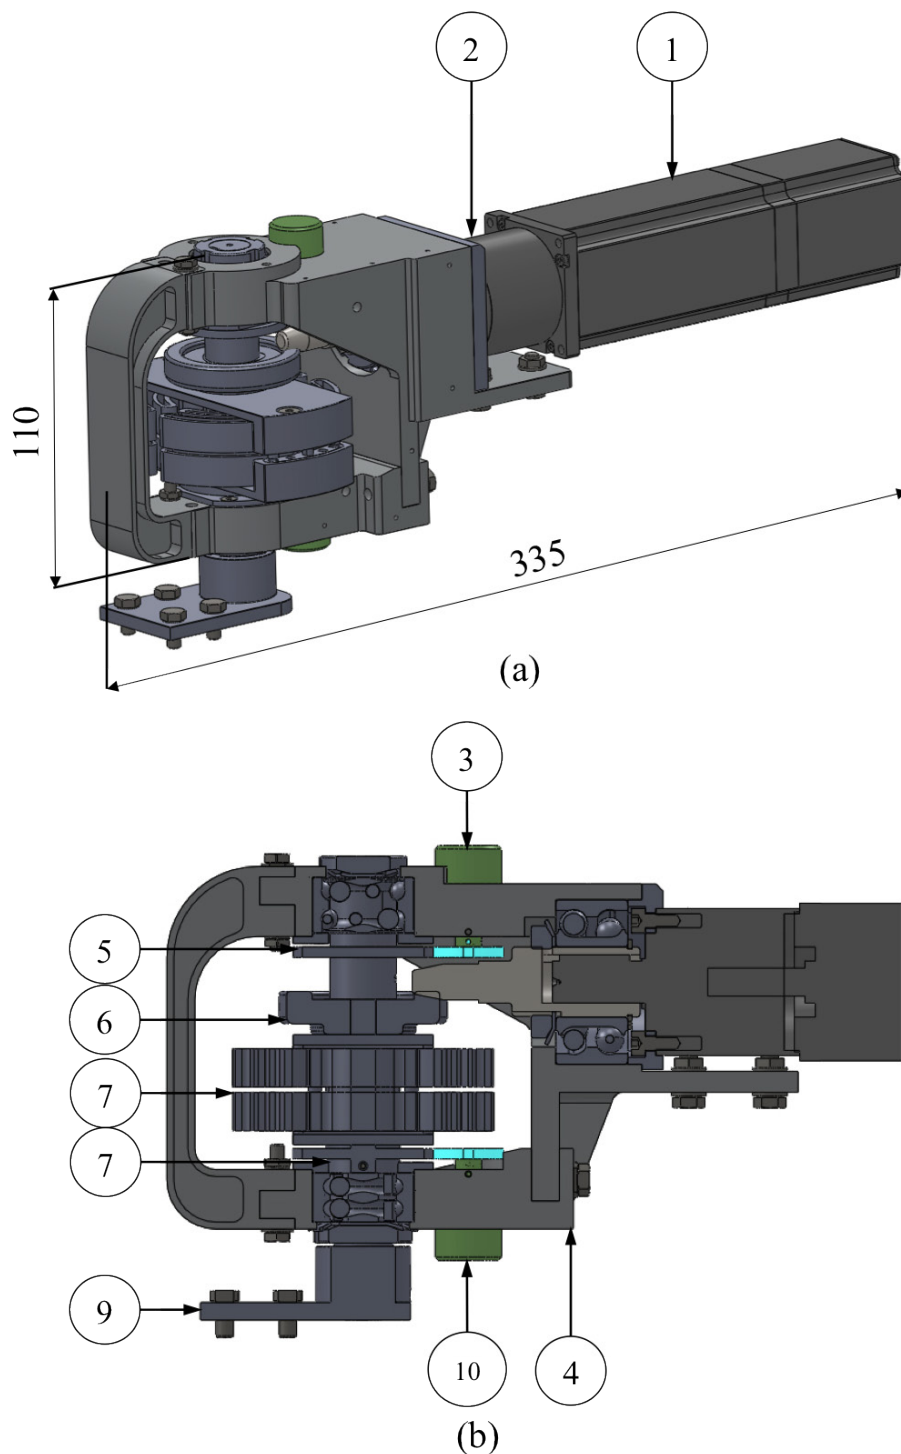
(a) 3D CAD view of the second version of SEA 300W; (b) Zoom of the cross section at hypoid gear level. 1: Maxon EC-4pole 45, 300W equipped with an integrated incremental encoder, 2: Maxon planetary gear, 3: absolute encoder, 4: fork-shaped frame, 5: absolute encoder gear; 6: KHK hypoid gear, 7: new springs pack, 8: absolute encoder gear, 9: output link, 10: absolute encoder. Dimensions: 110 mm (thickness) \times 336 mm (axial length). Total mass is 3.5 kg.
